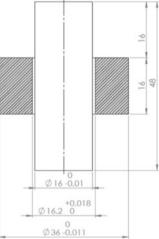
Dimensions and shape of the cylindrical adhesive joints
